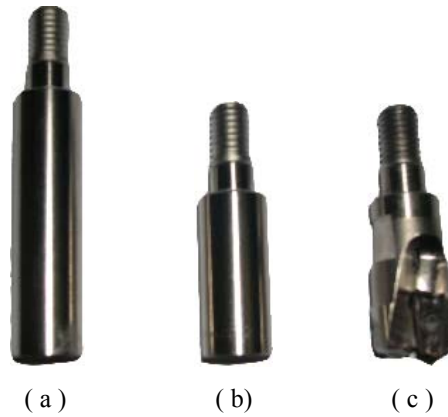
Interchangeable Calibration Cutters and Cutting Cutter: (a) 50 mm length, 13 mm diameter calibration cutter; (b) 30 mm length, 13 mm diameter calibration cutter; (c) two-fluted cutting cutter with 16 mm tool diameter.
